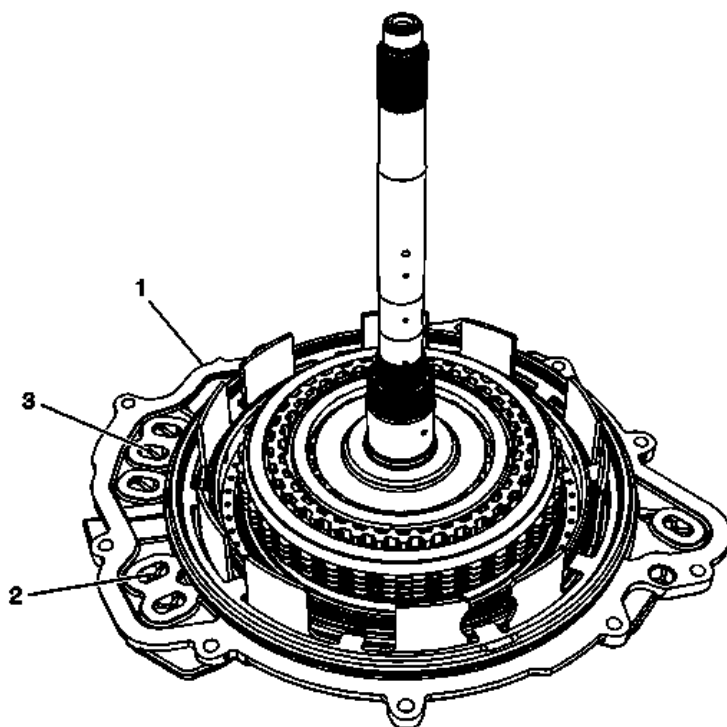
View of 35R and 4-5-6 Clutch Piston Air Check
